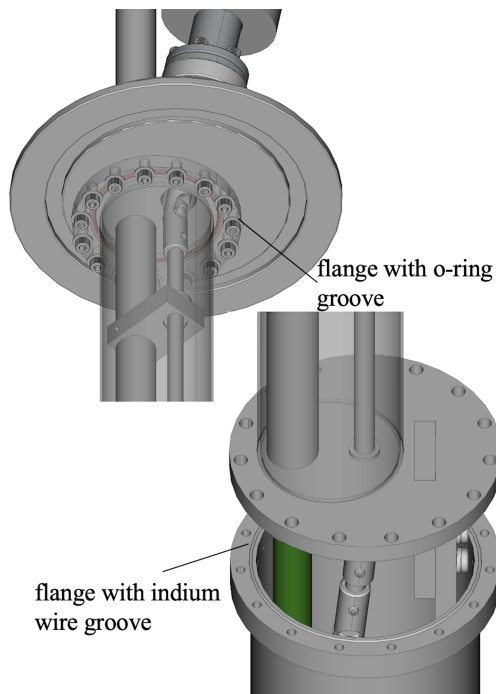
Upper and lower flanges that are welded to the 6061 aluminum tubing to house the internals of the tumbler photochemistry stick. The upper flange uses a rubber o-ring to seal, while the lower flange uses an indium seal. Both flanges have circular pockets with diameter matching the aluminum tubing outer diameter to ensure weld placement.
